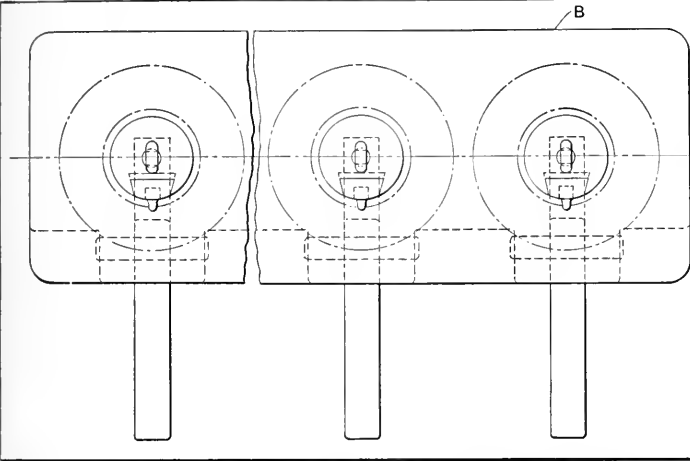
Fixture equipped with Four Mandrels for babbitting Bearings with Straight Oil Groove
